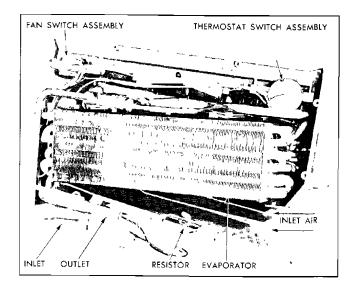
Viewing Evaporator Asesmbly with Lower Pan Removed
